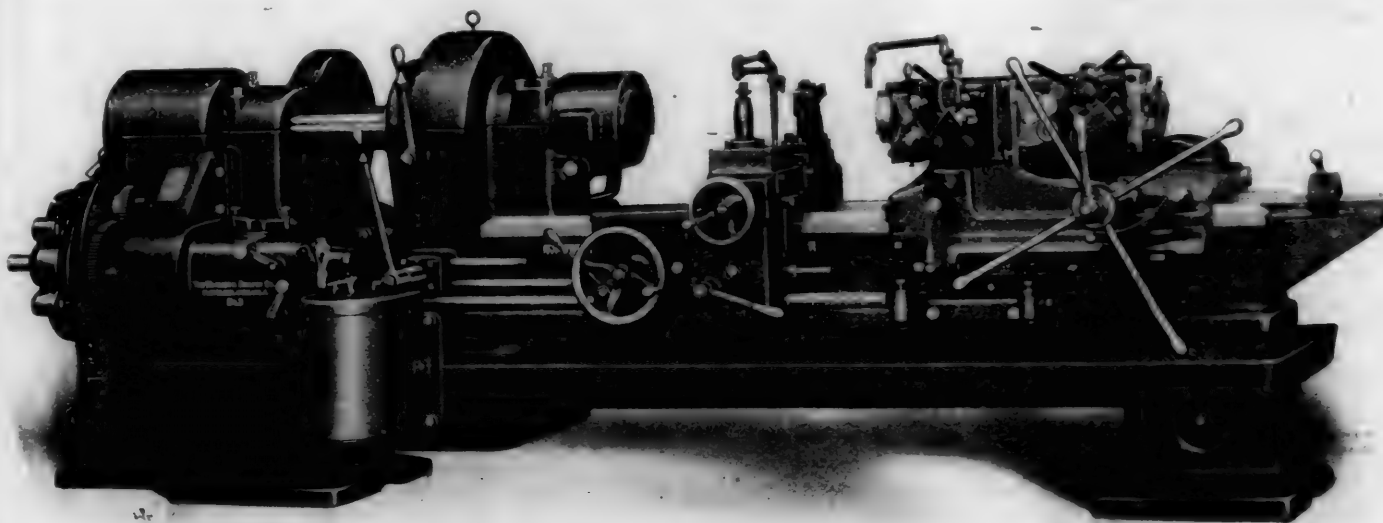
NO. 3 HOLLOW HEXAGON TURRET LATHE.—WARNER & SWASEY COMPANY.
